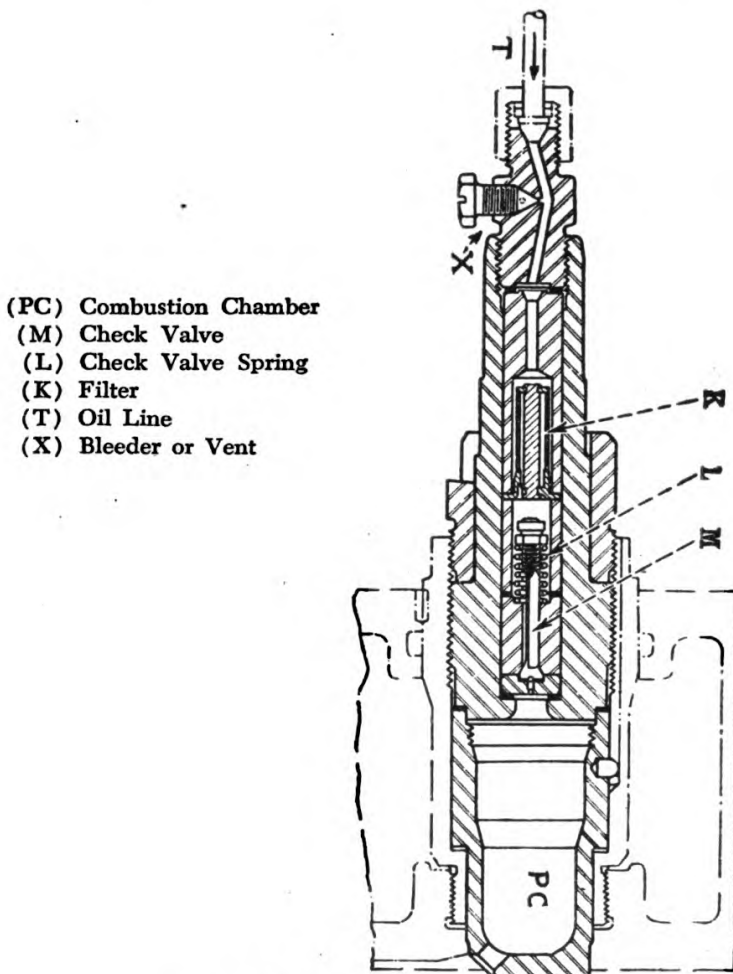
Pre-combustion Chamber of the McCormick-Deering Diesel
